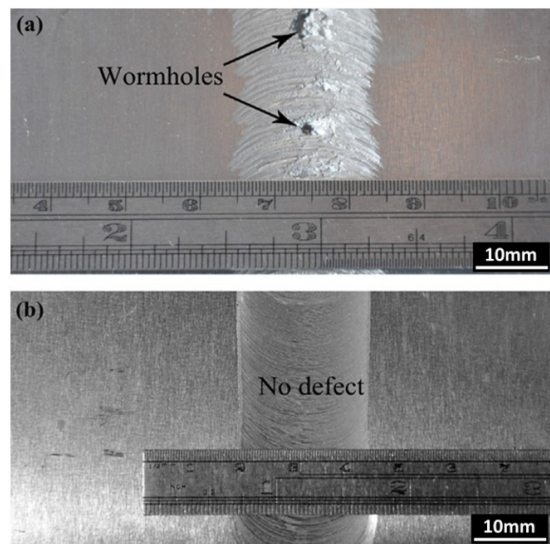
AA2219 weld surface appearance of IRFSW at constant 600 rpm tool rotation and different welding speeds (a) IRFSW with high welding speed (500 mm/min) (b) IRFSW with optimized welding speed (300 mm/min) [105].
